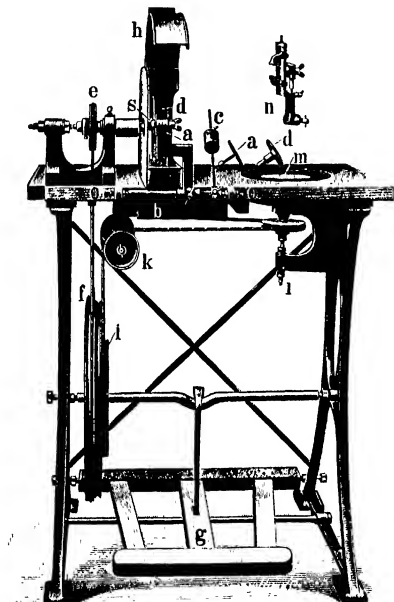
Stöck & Reuter's Foot Machine for Crystal Cutting and Grinding.
